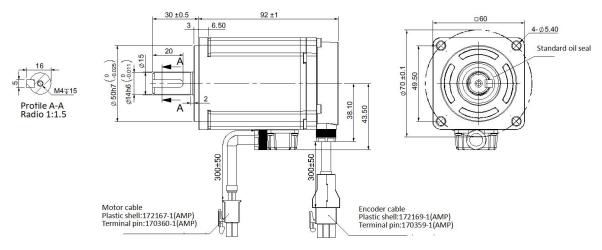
Installation dimension drawing of WD series 60 flange servo motor
